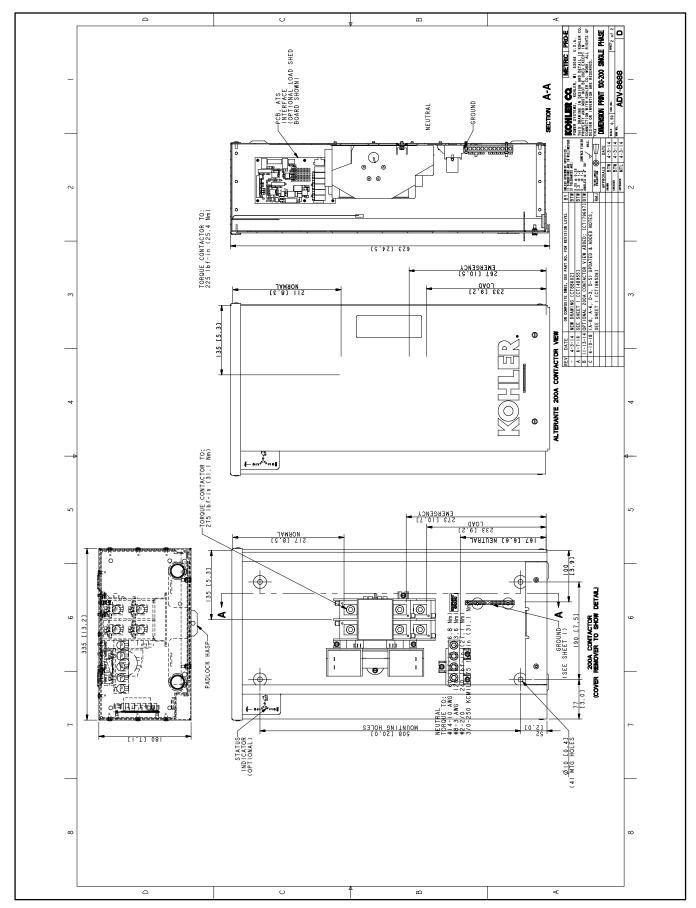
Enclosure Dimensions, 100-200 Amp Single-Phase, ADV-8688, Sheet 2 of 2
